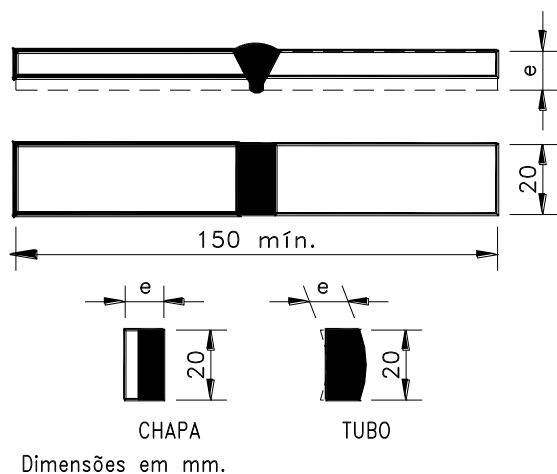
TEST SPECIMEN FOR CROSS BENDING OF FACE IN PLATES AND TUBES
